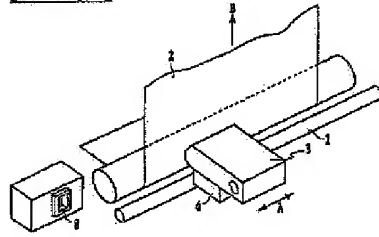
It is a perspective view for explaining the creation process of the ink container of drawing 9.
